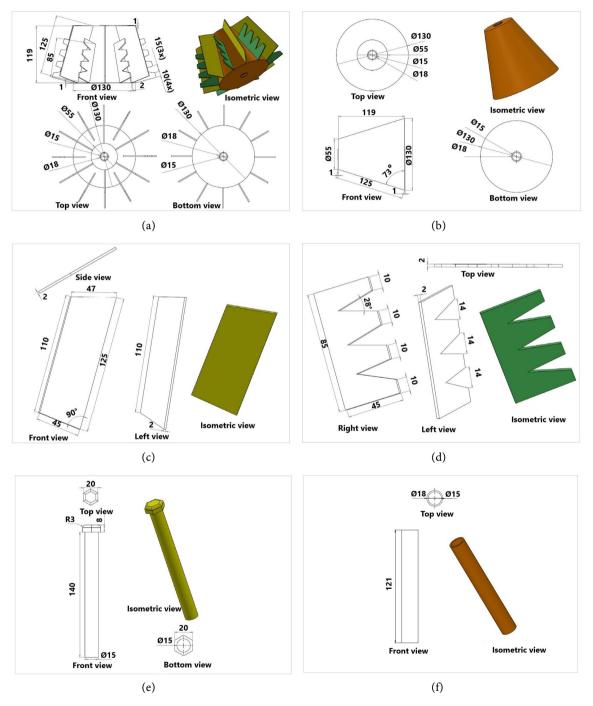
Different views of the rotor assembly of the weeder (all dimensions are in mm). (a) Different views of the rotor; (b) different views of the drum; (c) different views of the plain blade; (d) different views of the serrated blade; (e) different views of axle/spindle; (f) different views of the bush.
